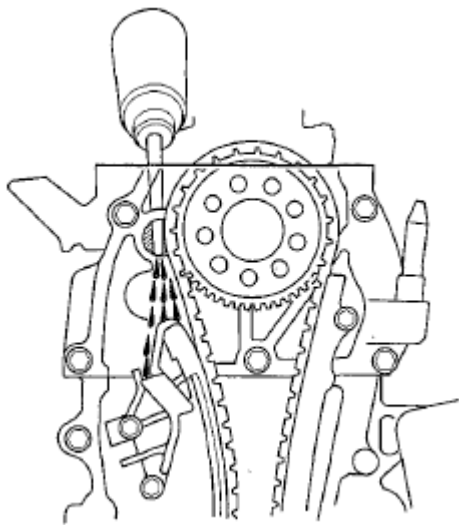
Applying Engine Oil To Slider Surface Of Cam Chain Tensioner Slider
